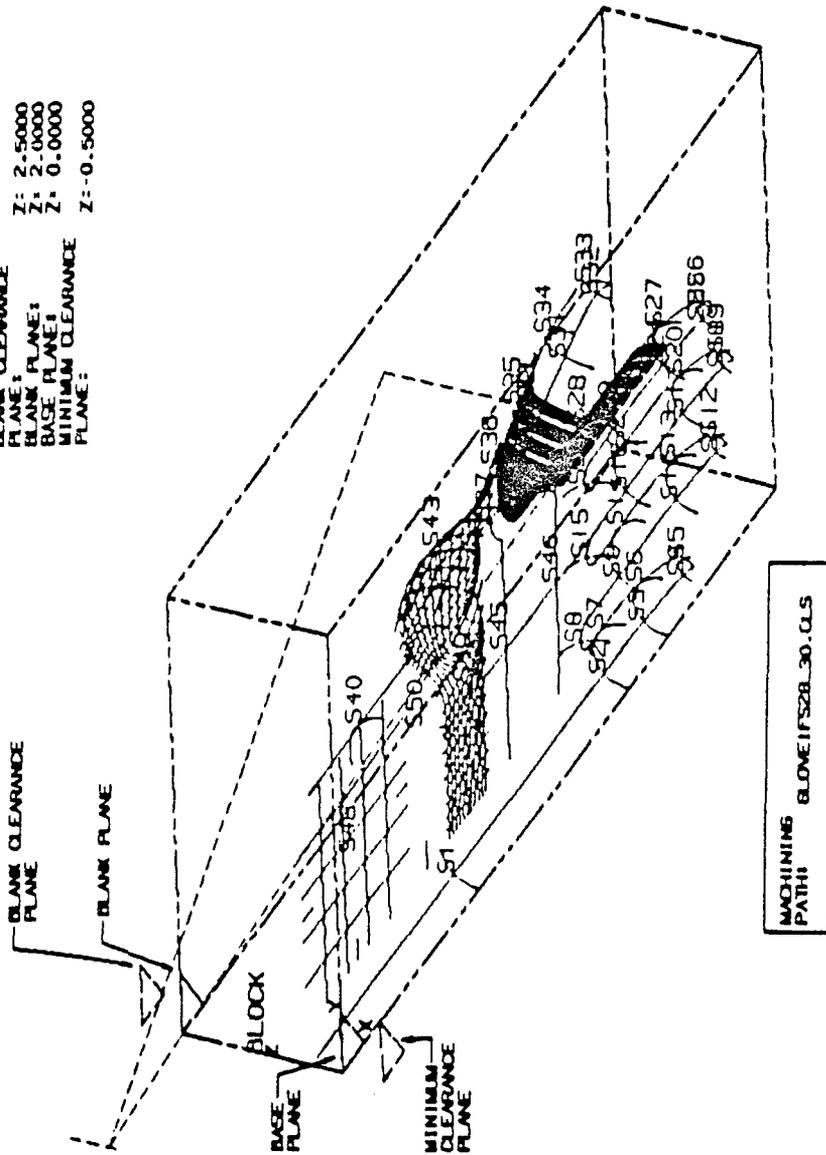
Machining Path: GLOVE1FS28\_30.CLS
